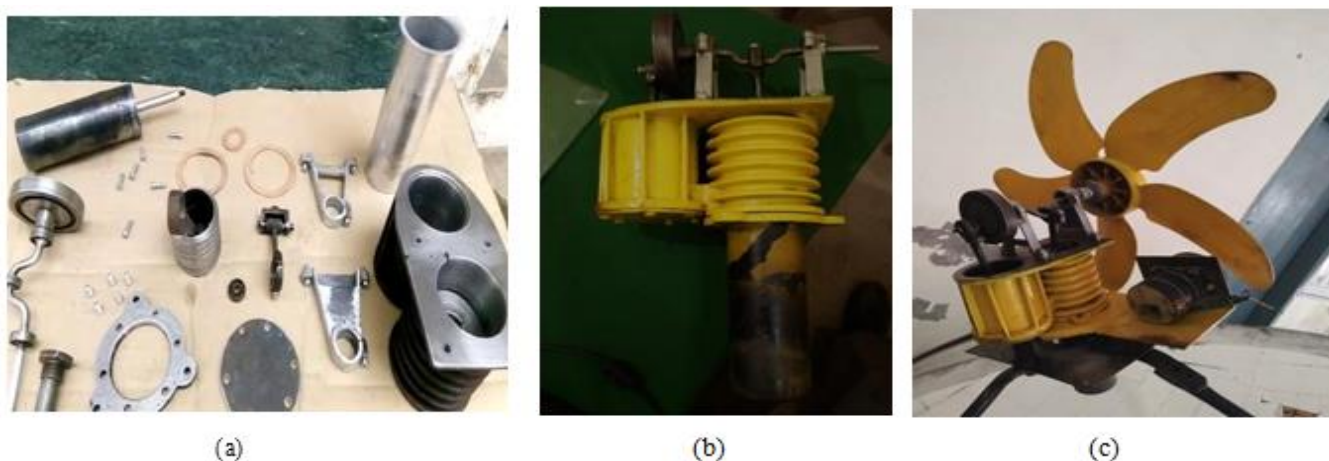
(a) Parts (b) Fabricated Model (c) Installed Model
